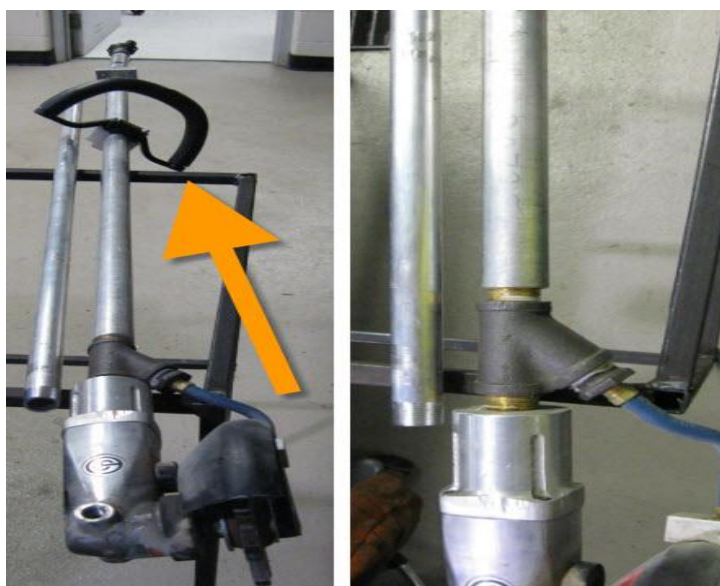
Added handle and smaller pipe diameter ready to be installed.
